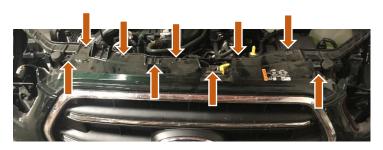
Plastic Rivets (Top) and Bolts (Bottom) to be Removed
